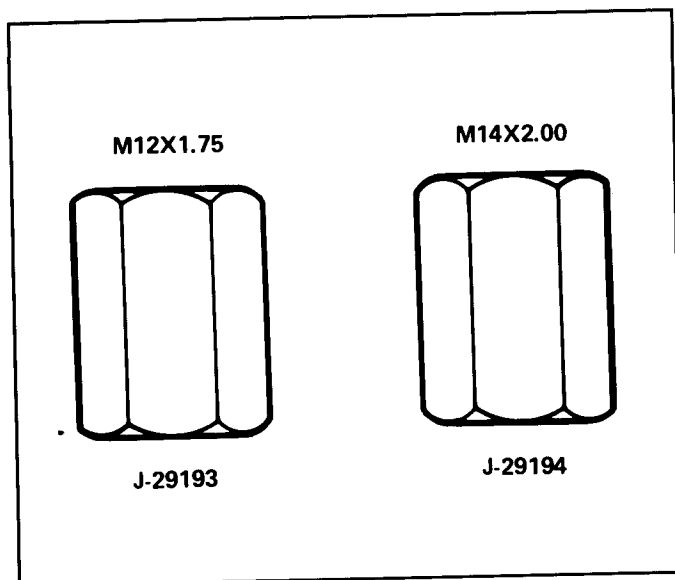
B6-6--Special Tools Used to Seat the Tapers
